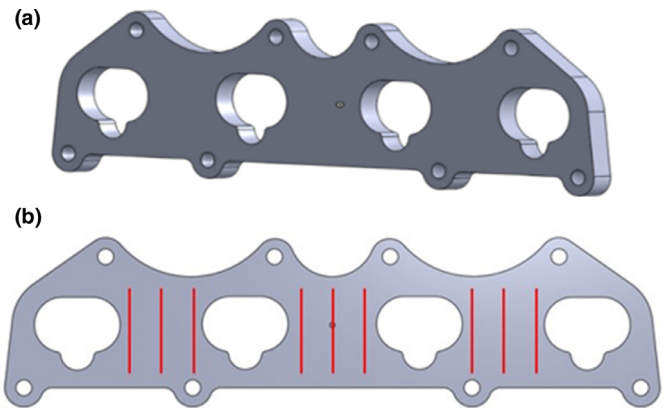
(a) CAD model of the engine intake flange; (b) measurement of surface roughness.
